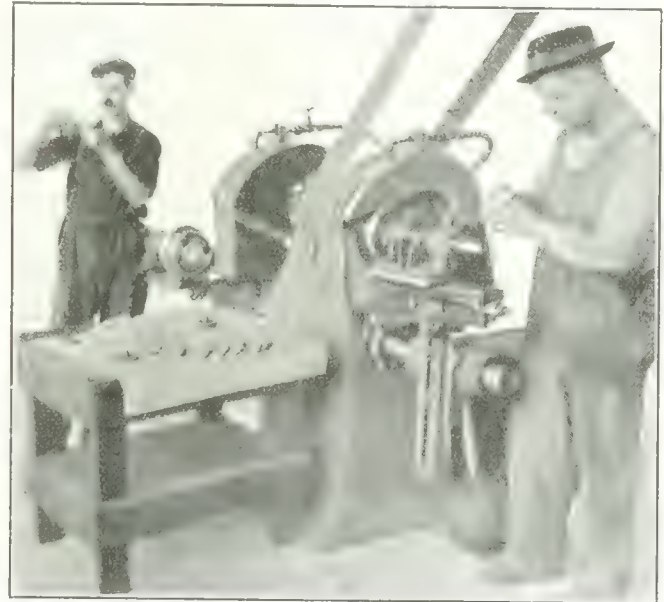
GRINDER SHOWN EQUIPPED WITH ROTARY CHUCKS AND HOODS.
